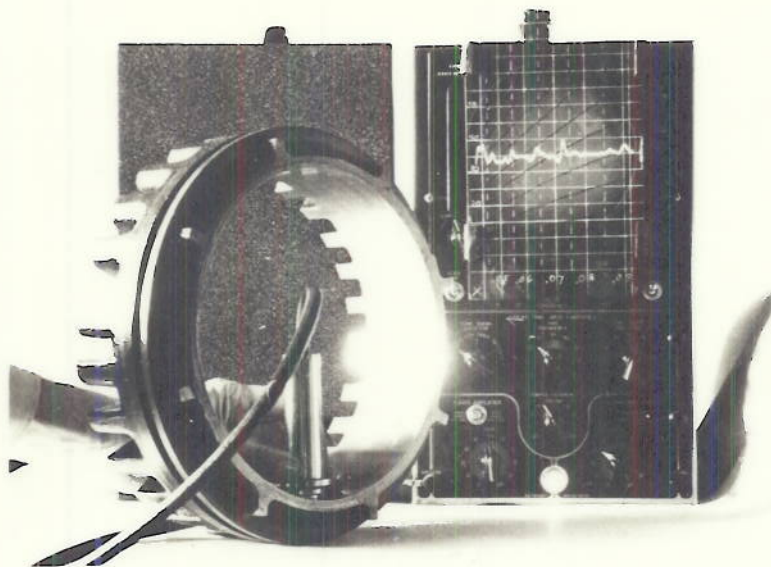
SONIGAGE ADAPTED TO LINER INSPECTION
